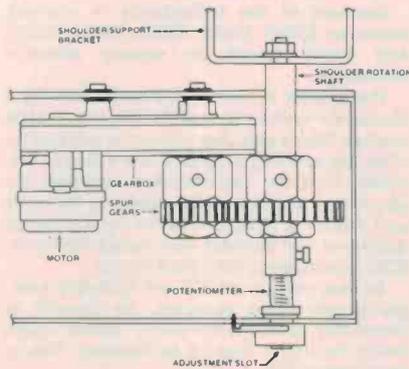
Simplified view of the rotation drive assembly. Note that the gearbox drive shaft comes out on the same side as the motor, unlike the shoulder and elbow drives.
